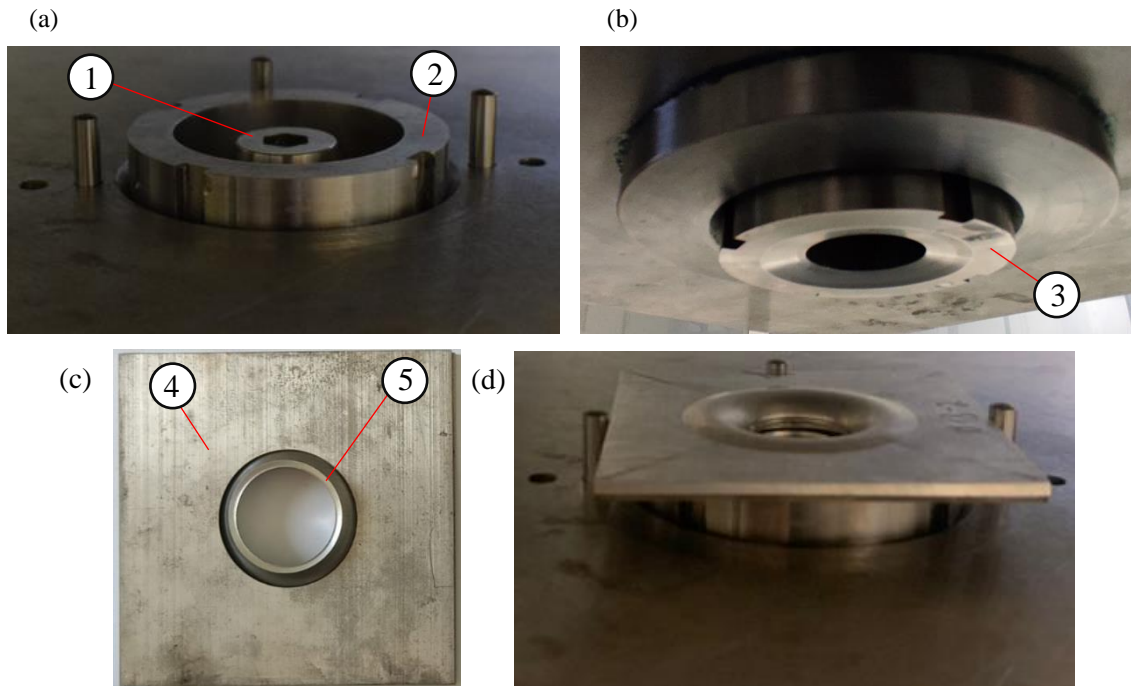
Hemming stage components and positioning of the sheets: (a) 1 – Hemming punch and 2 – blank holder, (b) 3 – bottom die, (c) 4 – inner sheet and 5 – outer sheet and (d) positioning of the sheets in the top of the blank holder by means of alignment pins.
